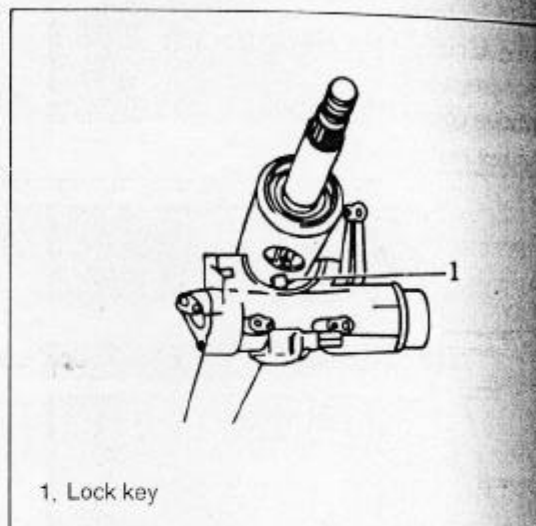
C — 14 ASSEMBLING STEERING LOCK
